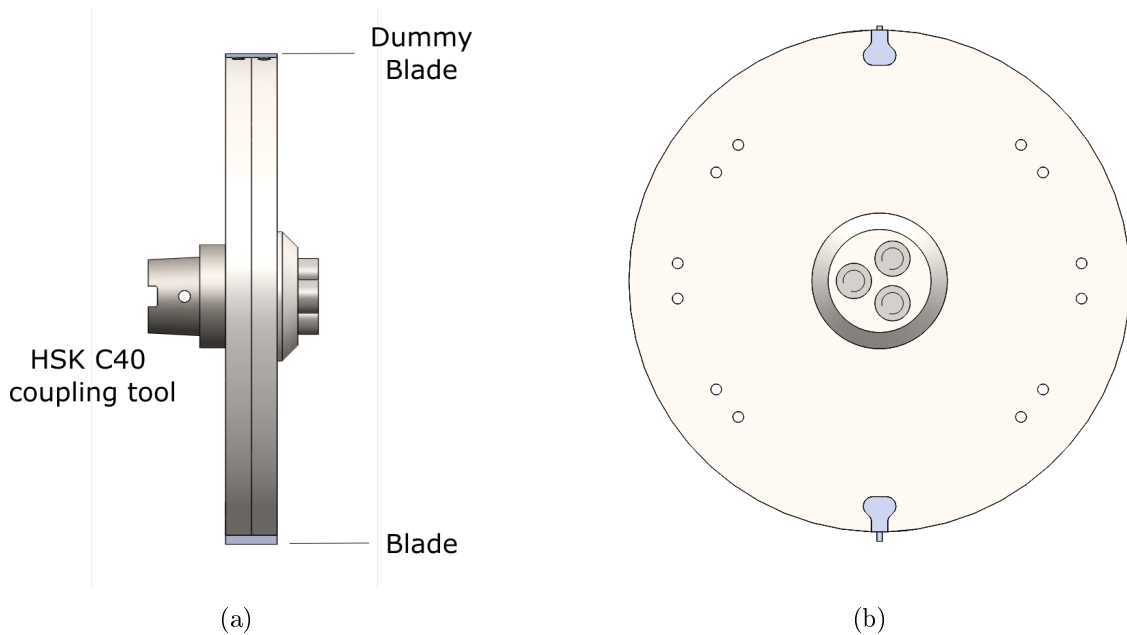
(a) CAD showing the disc and blade assembly from the side, (b) CAD showing the disc and blade assembly from the front
